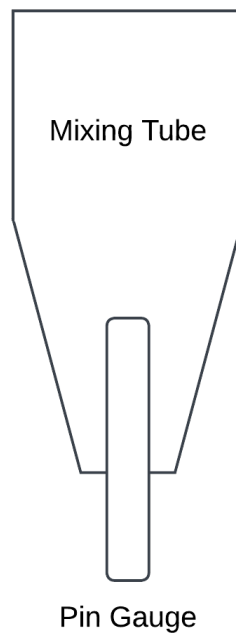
Schematic illustrating the measurement of a mixing tube’s exit diameter using a pin gauge.
